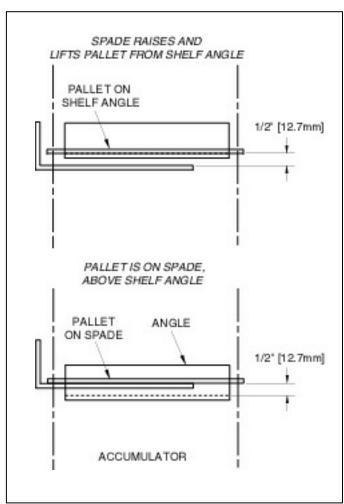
SWITCH LS-31 ADJUSTMENT.
